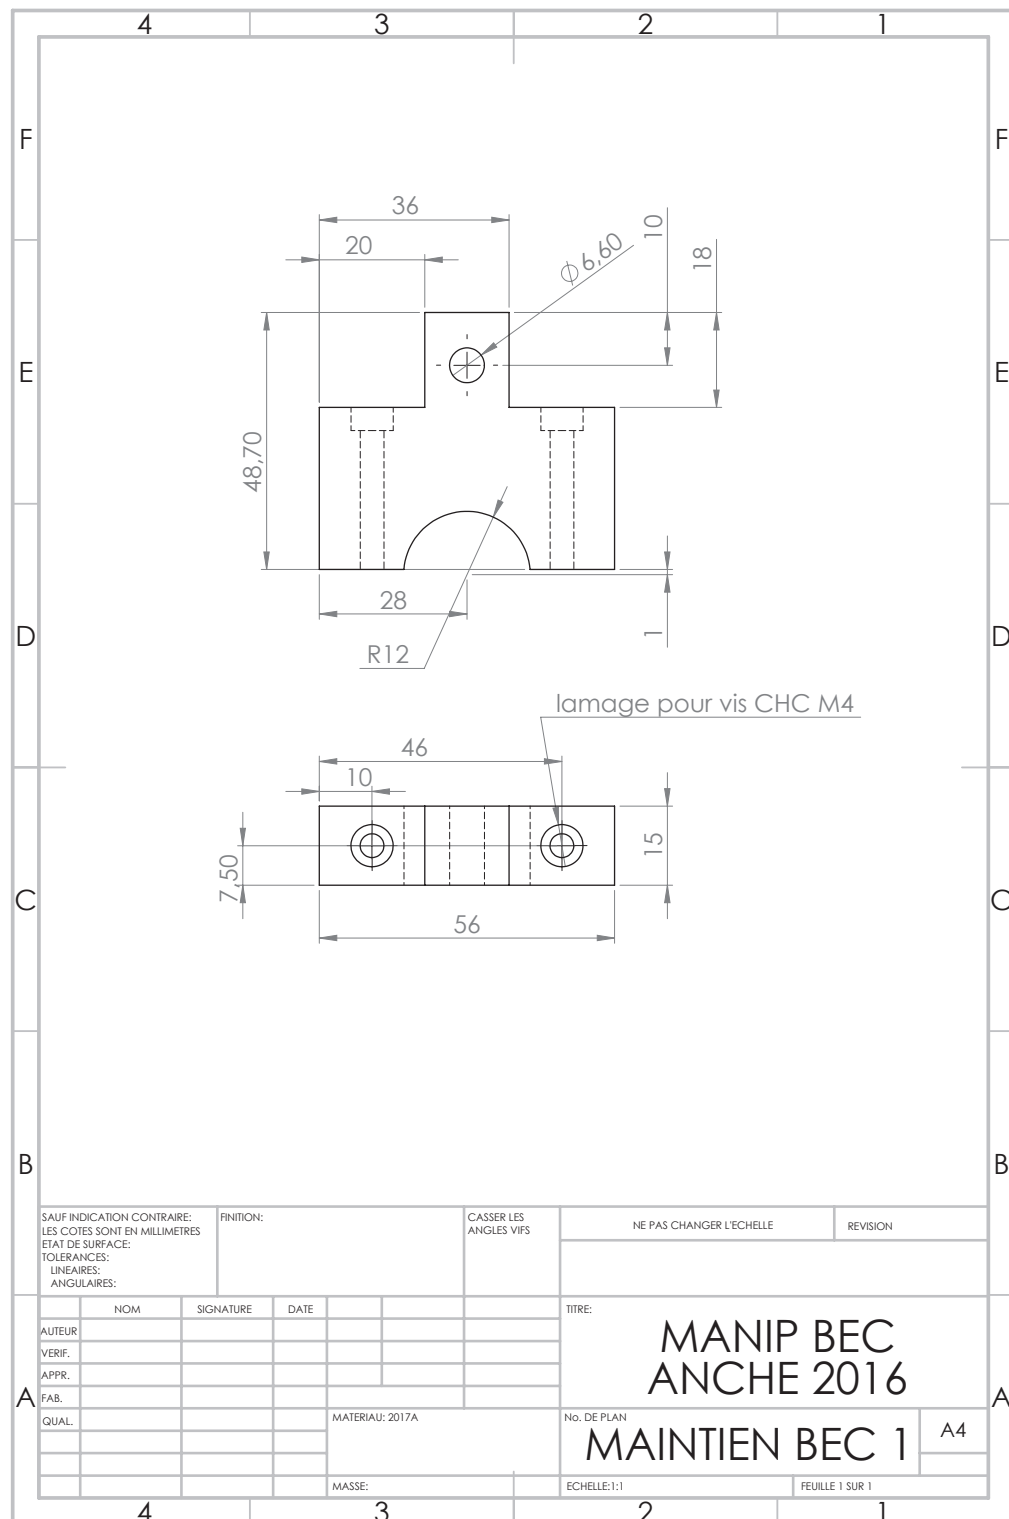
Dimensioned drawing of the clamp of the mouthpiece I (3). Provided by LAUM mechanical workshop.
